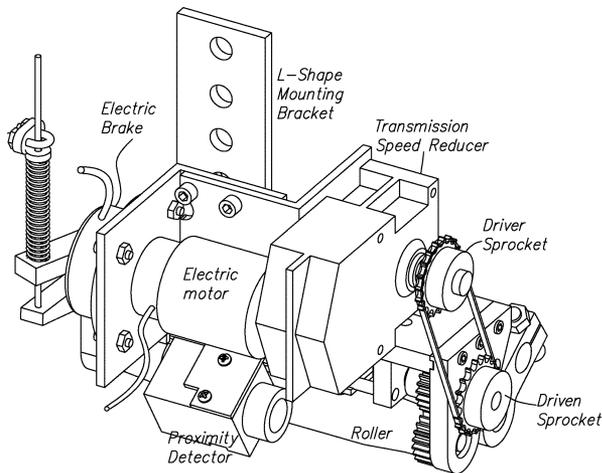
Electric brake is installed on the mounting bracket to lock the motor when needed. When the brake is not powered electrically, it is engaged, preventing the motor shaft from turning.
